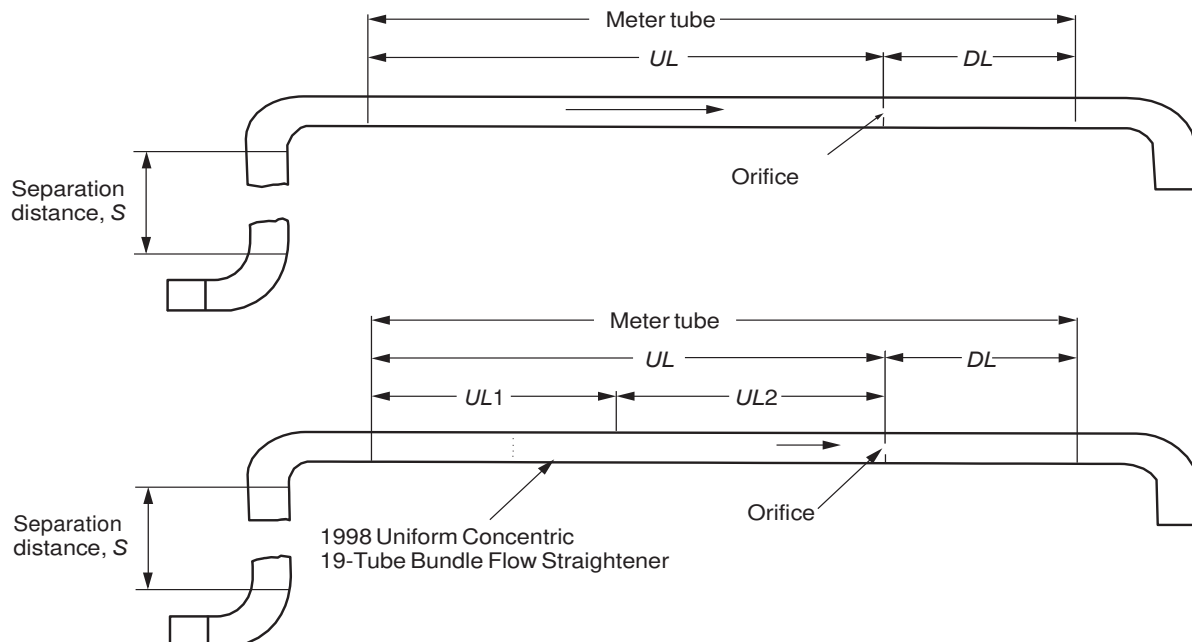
Orifice Meter Tube Layout for Flanged or Welded Inlet
